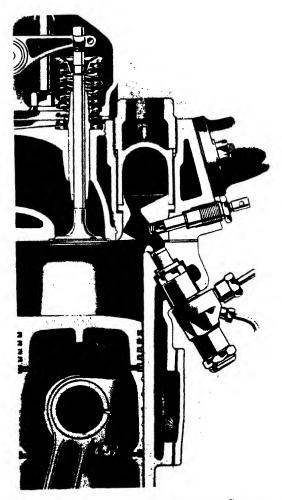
THE BOSCH-ACRO PRE-COMBUSTION CHAMBER USED ON THE EARLIER A.E.C. DIESEL ENGINES
